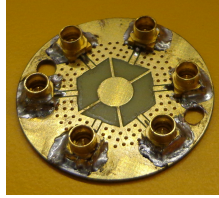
PCB for mounting sample with soldered surface mount super SMP connectors
